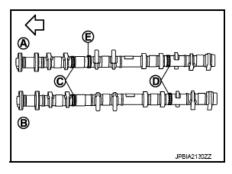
Locating Camshaft (EXH) Identification Rib And Paint Mark Courtesy of NISSAN NORTH AMERICA, INC.
